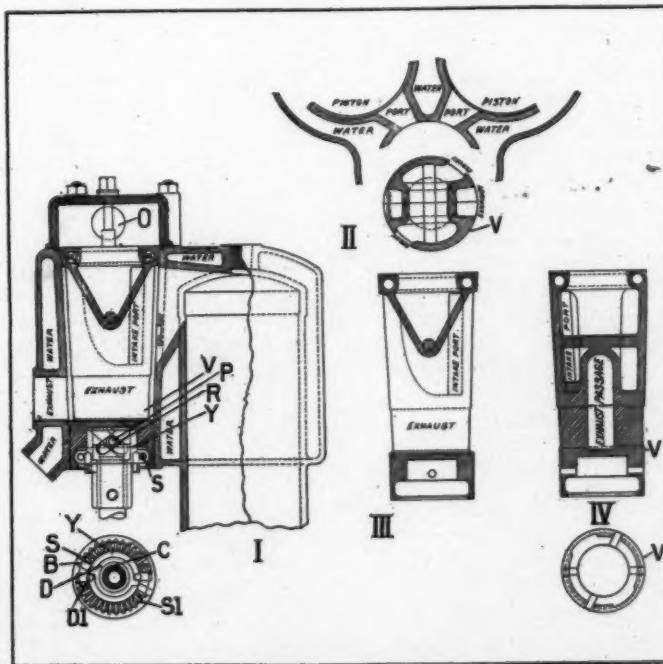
Details of construction of the Silent rotary valve and actuating mechanism, showing tapered design
